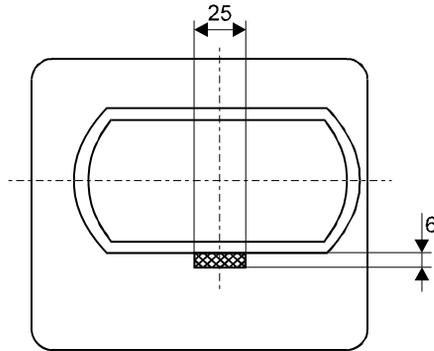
Bottom corner fitting (bottom view)
